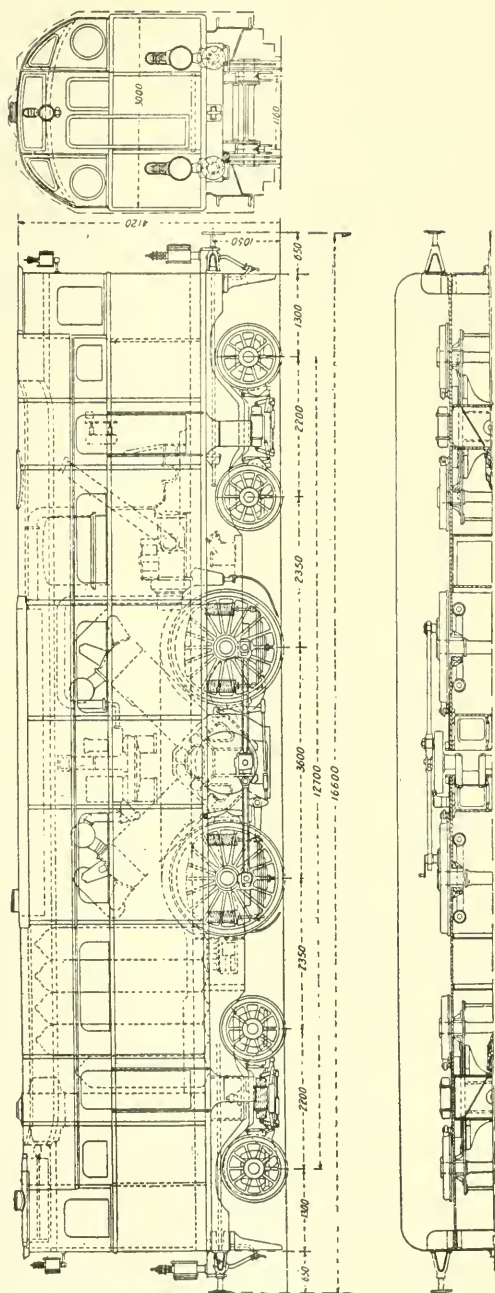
SECTIONAL VIEWS OF DIESEL LOCOMOTIVE
